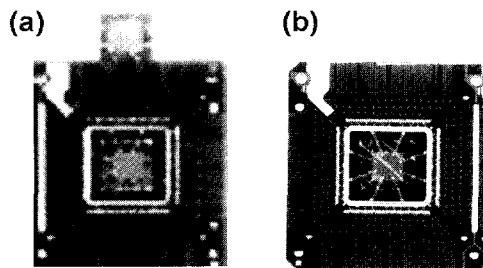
PCB and Silicon chip full test fracture mode (a) Normal fracture mode between solder mask and Cu trace (b) abnormal fracture mode between Die attach adhesive and solder mask surface.
